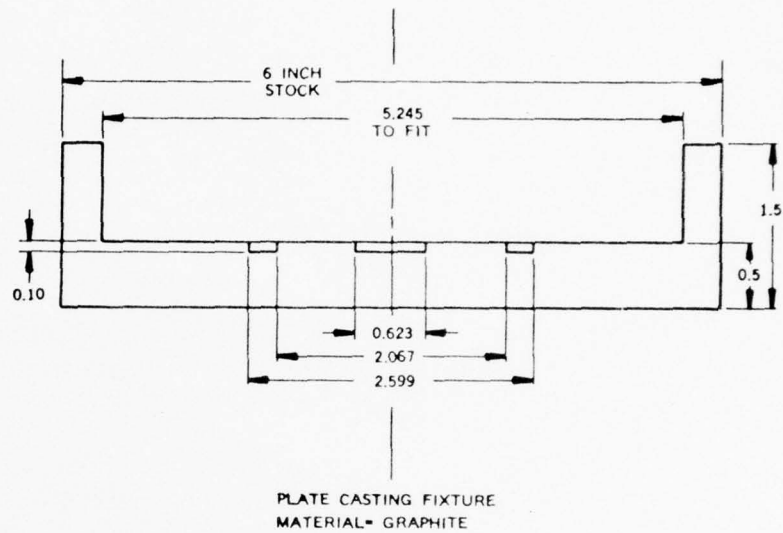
Bottom Plate of Casting Fixture SK2340-004-1
